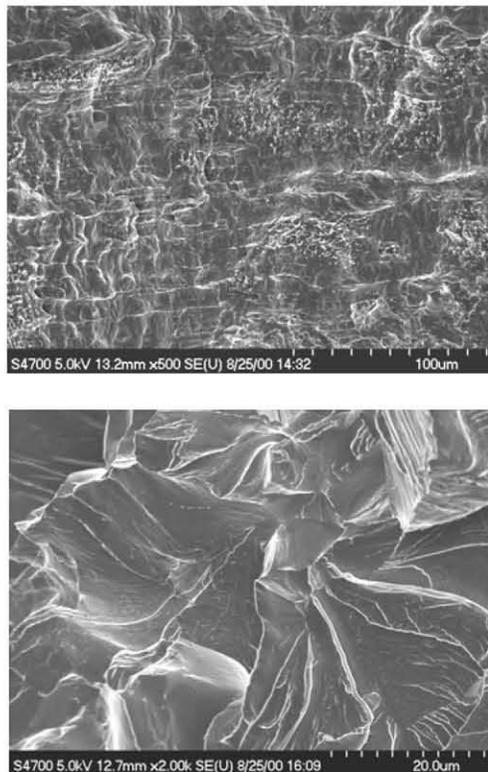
Whereas the fracture of the W2 Charpy specimen tested at room temperature is completely ductile (top), that of the -150°C specimen contained brittle cleavage features near specimen external surfaces (bottom).
